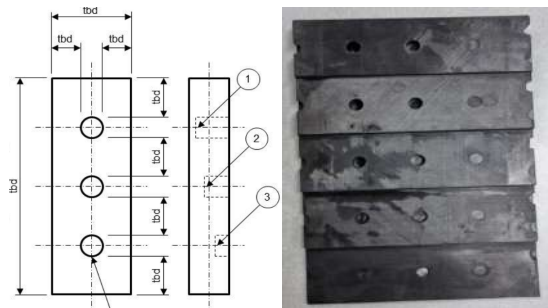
Drawings(left) and photographs(right) of the flat laminate specimens
